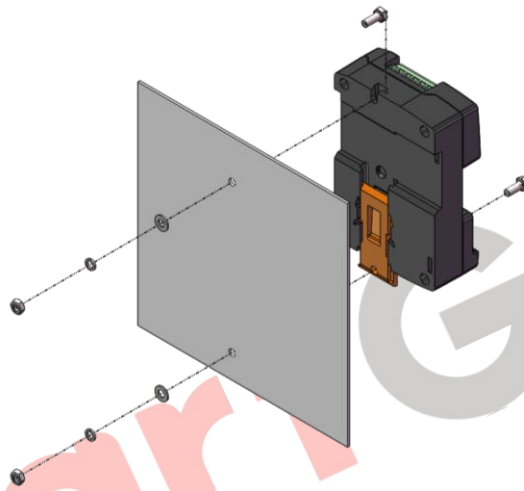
CMM366B-4G/CMM366CAN-4G Screw Installation
